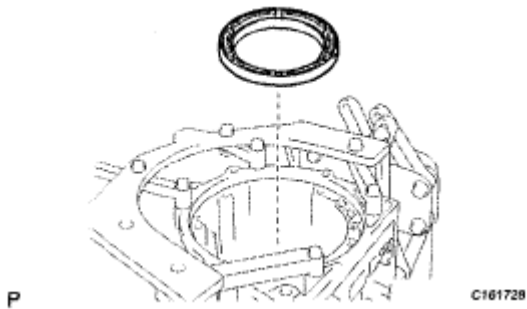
Identifying No. 2 Brake Cylinder With Piston To Transmission Case
